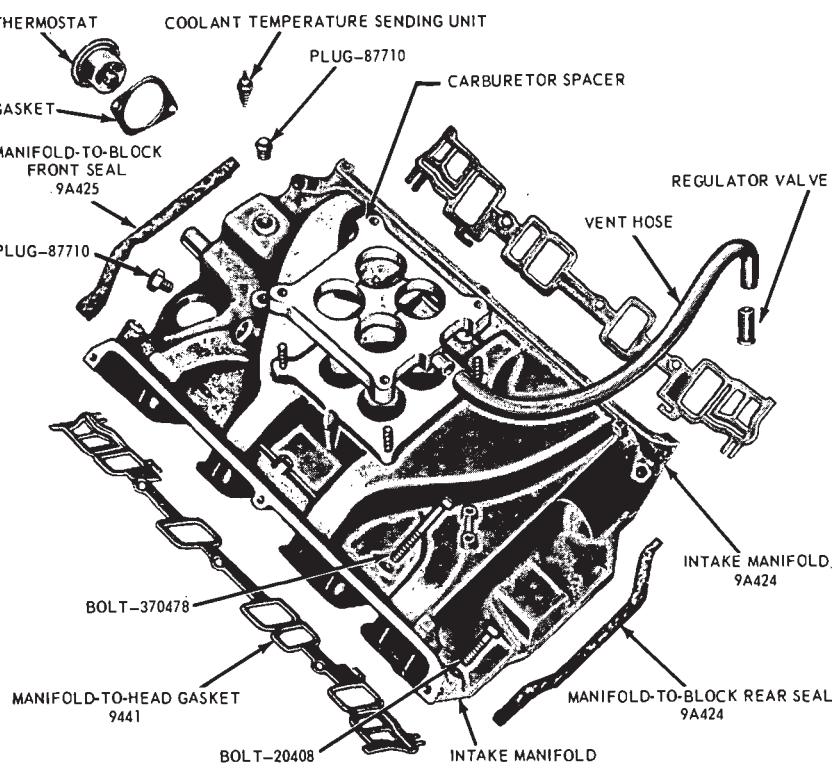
Typical Intake Manifold Assembly 390 and 428 V-8, Except 428 Police
